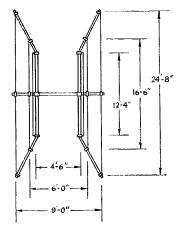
This quad uses a "dish" type of construction to allow optimum element spacing for each band. The horizontal dimensions show the element spacing. The vertical dimensions showdist ances between anchor points on opposite spreader arms—not element dimensions.
